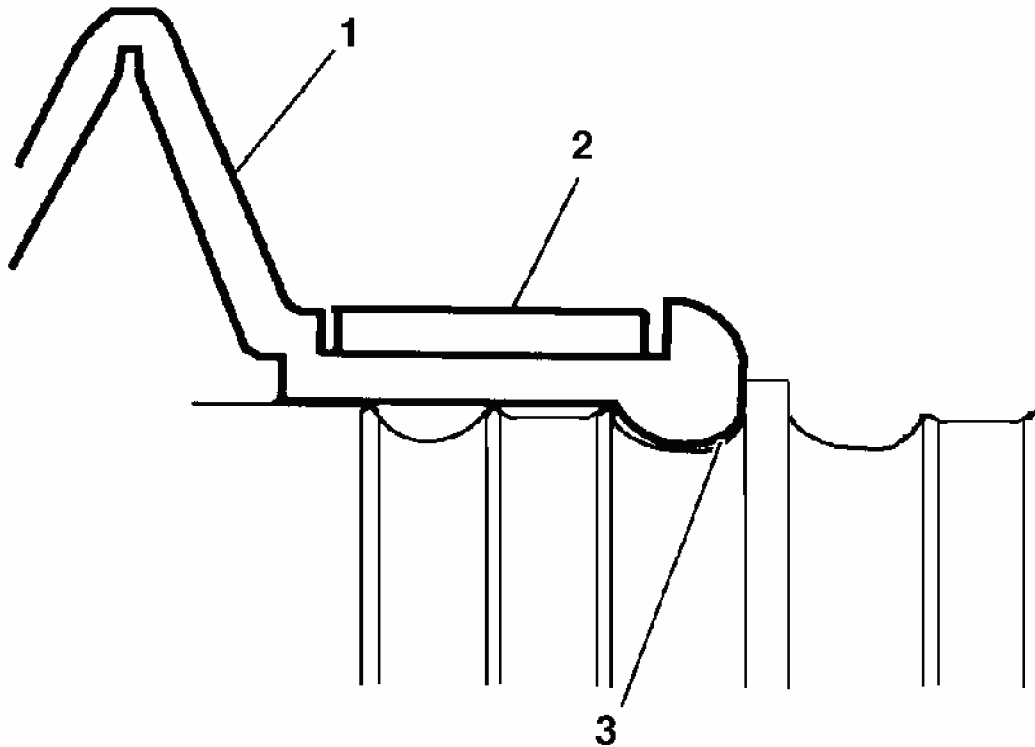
Positionng Small End Of Joint Seal Into Joint Seal Groove
